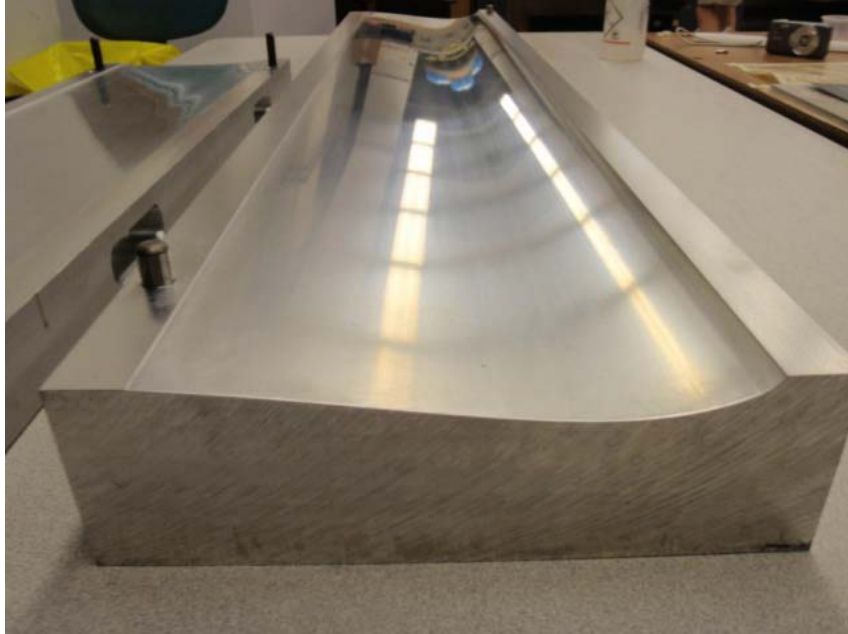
Aluminum wing mold used to shape and cure the X-HALE airfoil
